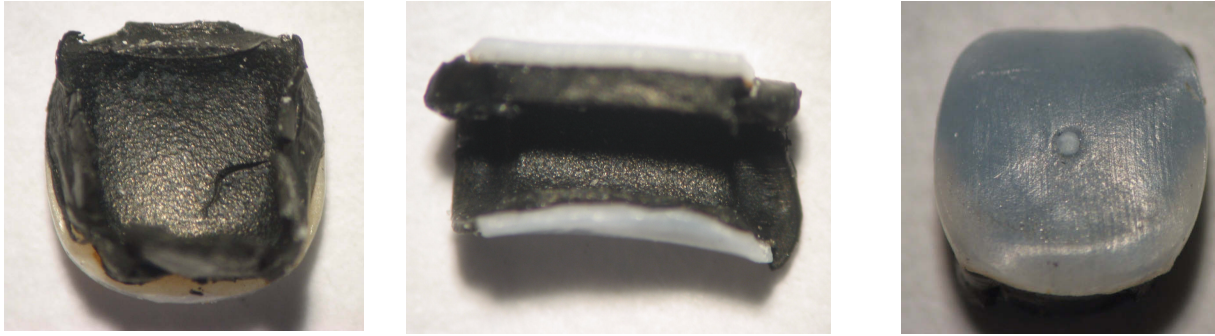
22 Damaged sealing discs made of Kalrez for the backpressure regulator
